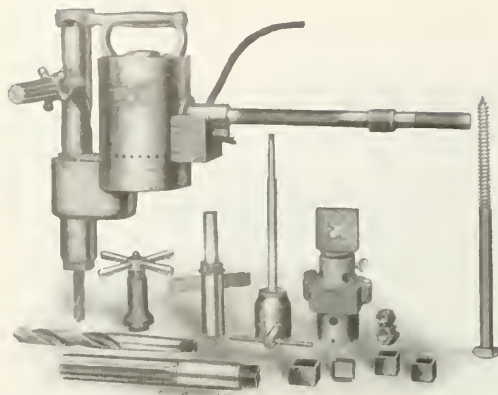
Combination Lag Screw Drilling and Driving Machine made by the Automatic Electrical Tool Co.
